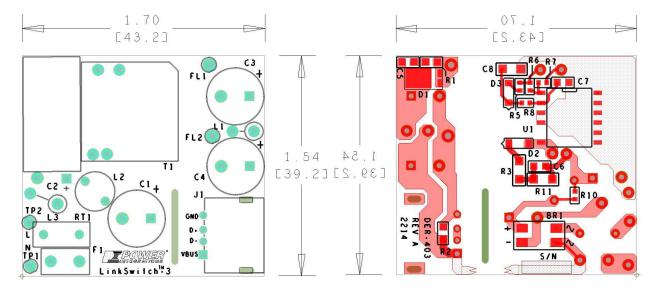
Printed Circuit Layout. (Top and Bottom).
